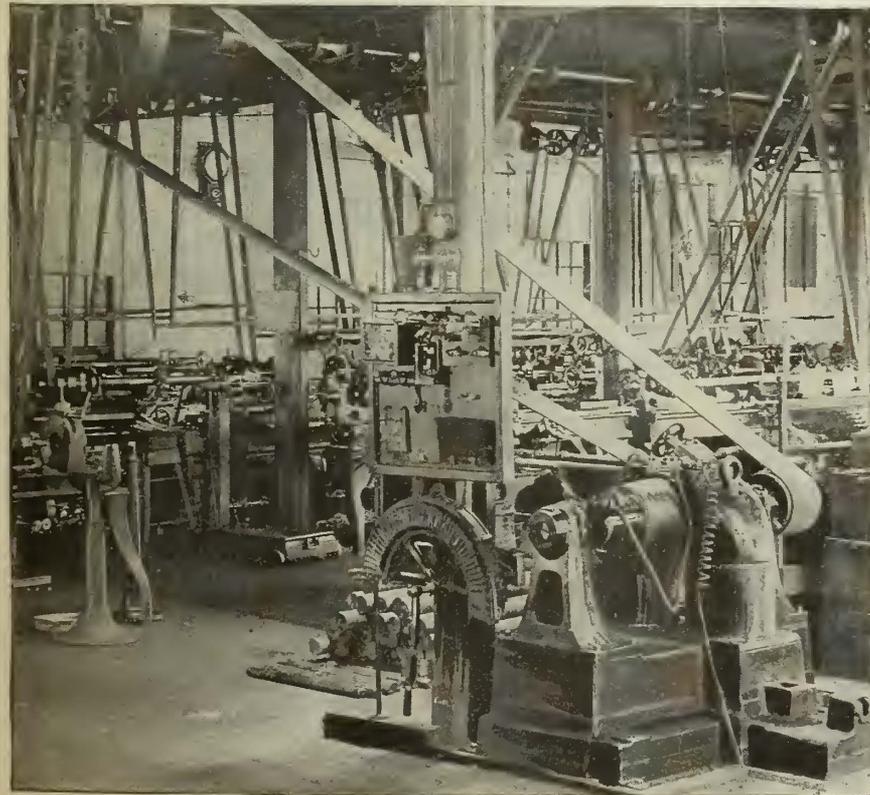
STATIONARY MOTOR DRIVING SHAFTING.
